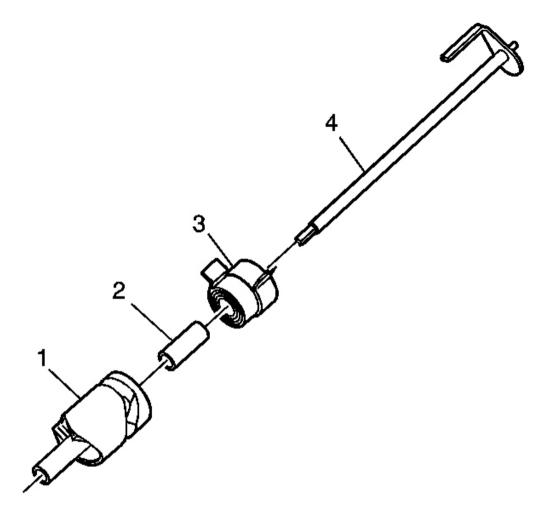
Shift Detent Lever Assembly Components Courtesy of GENERAL MOTORS CORP.
